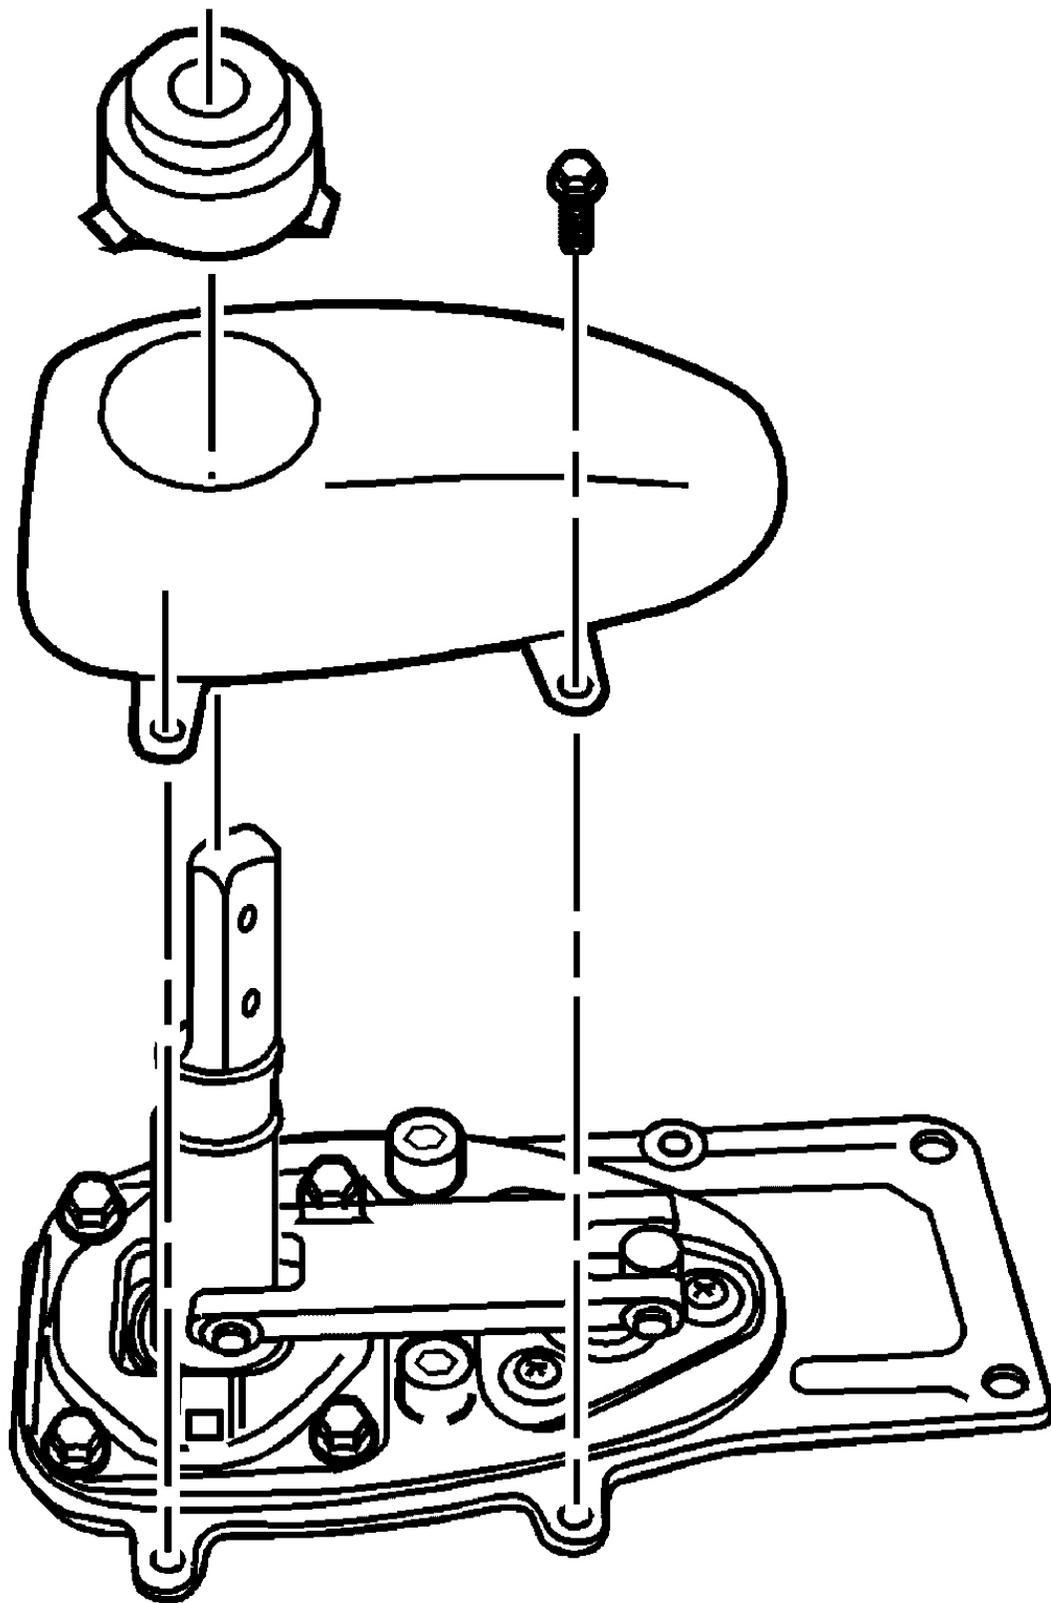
View Of Shift Lever Cover & Retaining Screws
